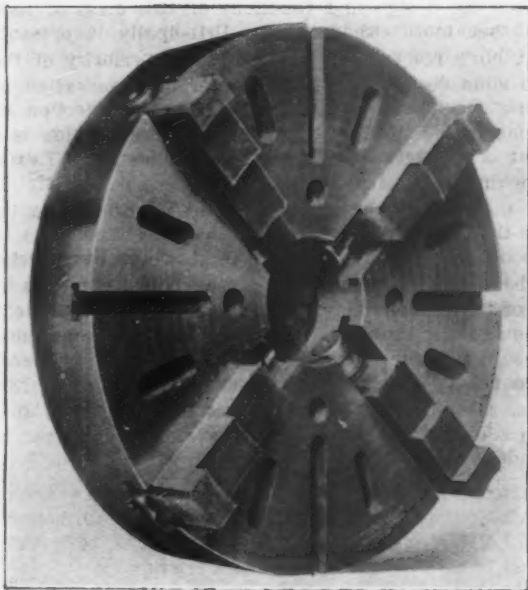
A 21-In. Chuck. Two Sizes of the Four-Jaw Independent Lathe Chuck Made by the S. E. Horton Machine Company, Windsor Locks, Conn.
